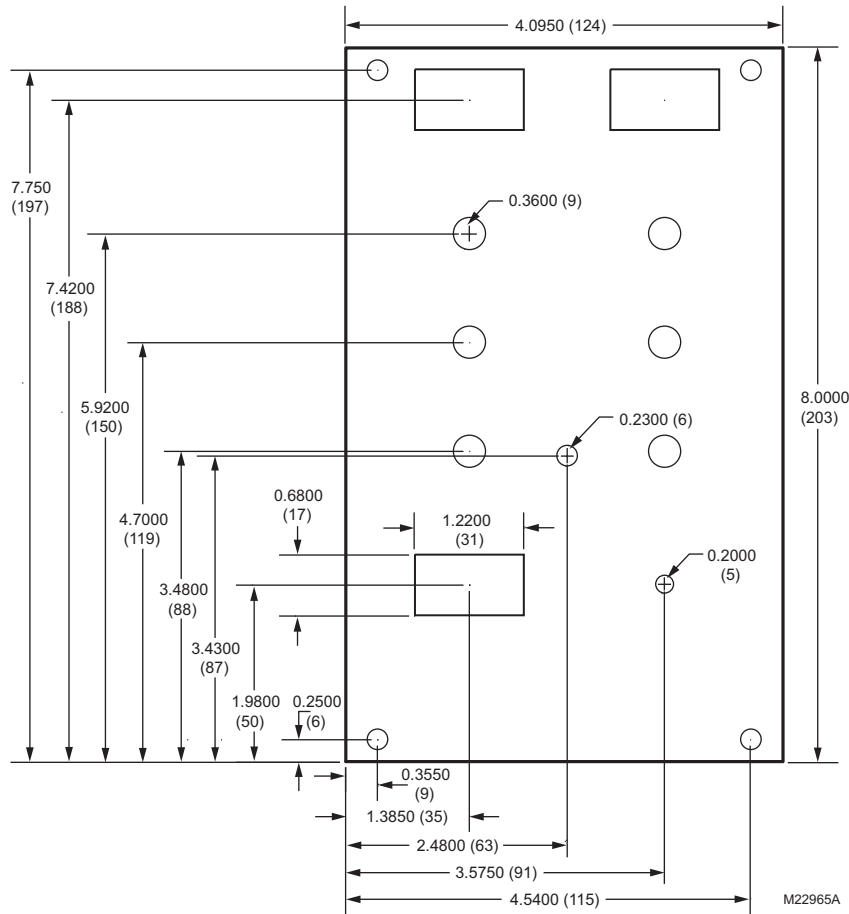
Enclosure mounting hole and cutout locations for the 50008378 LED/Switch board, all versions, dimensions in in. (mm).
